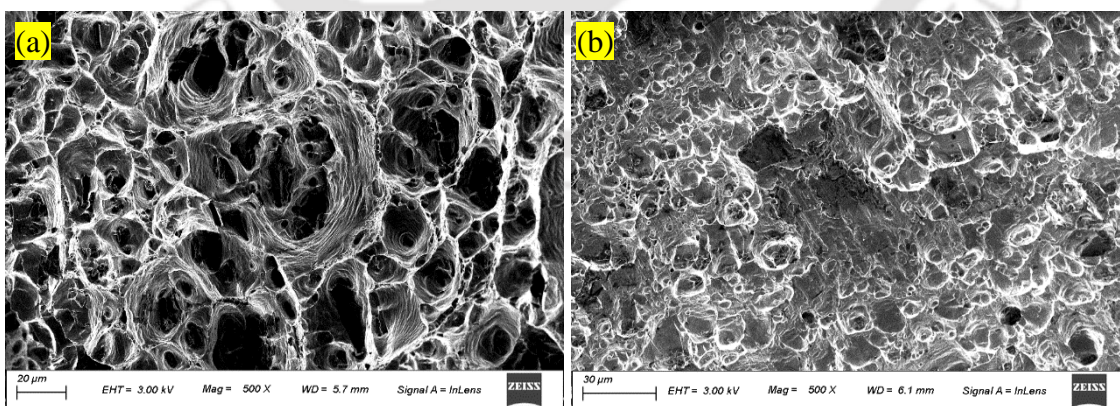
Tensile fractography of FSWed sample (a) before and (b) after the HT process
